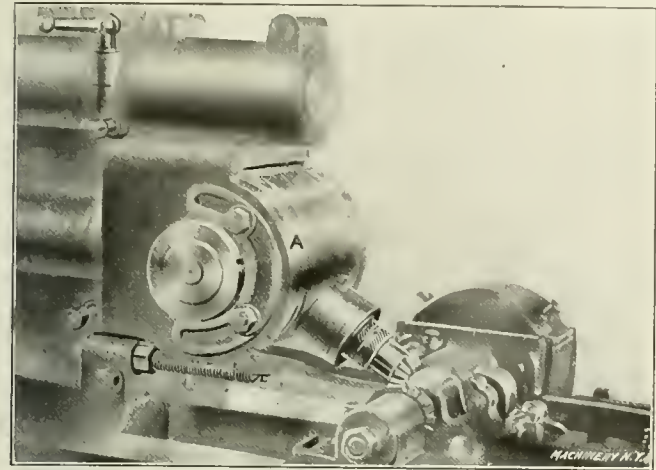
A Bevel Gear and Face Clutch Milling Attachment for the Brown & Sharpe Automatic Gear-cutter
